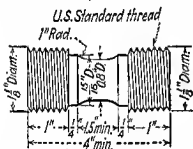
Test Specimen for Cast Iron (A.S.T.M. A48-36). Other test pieces 0.505 and 1.26 in. diam.
